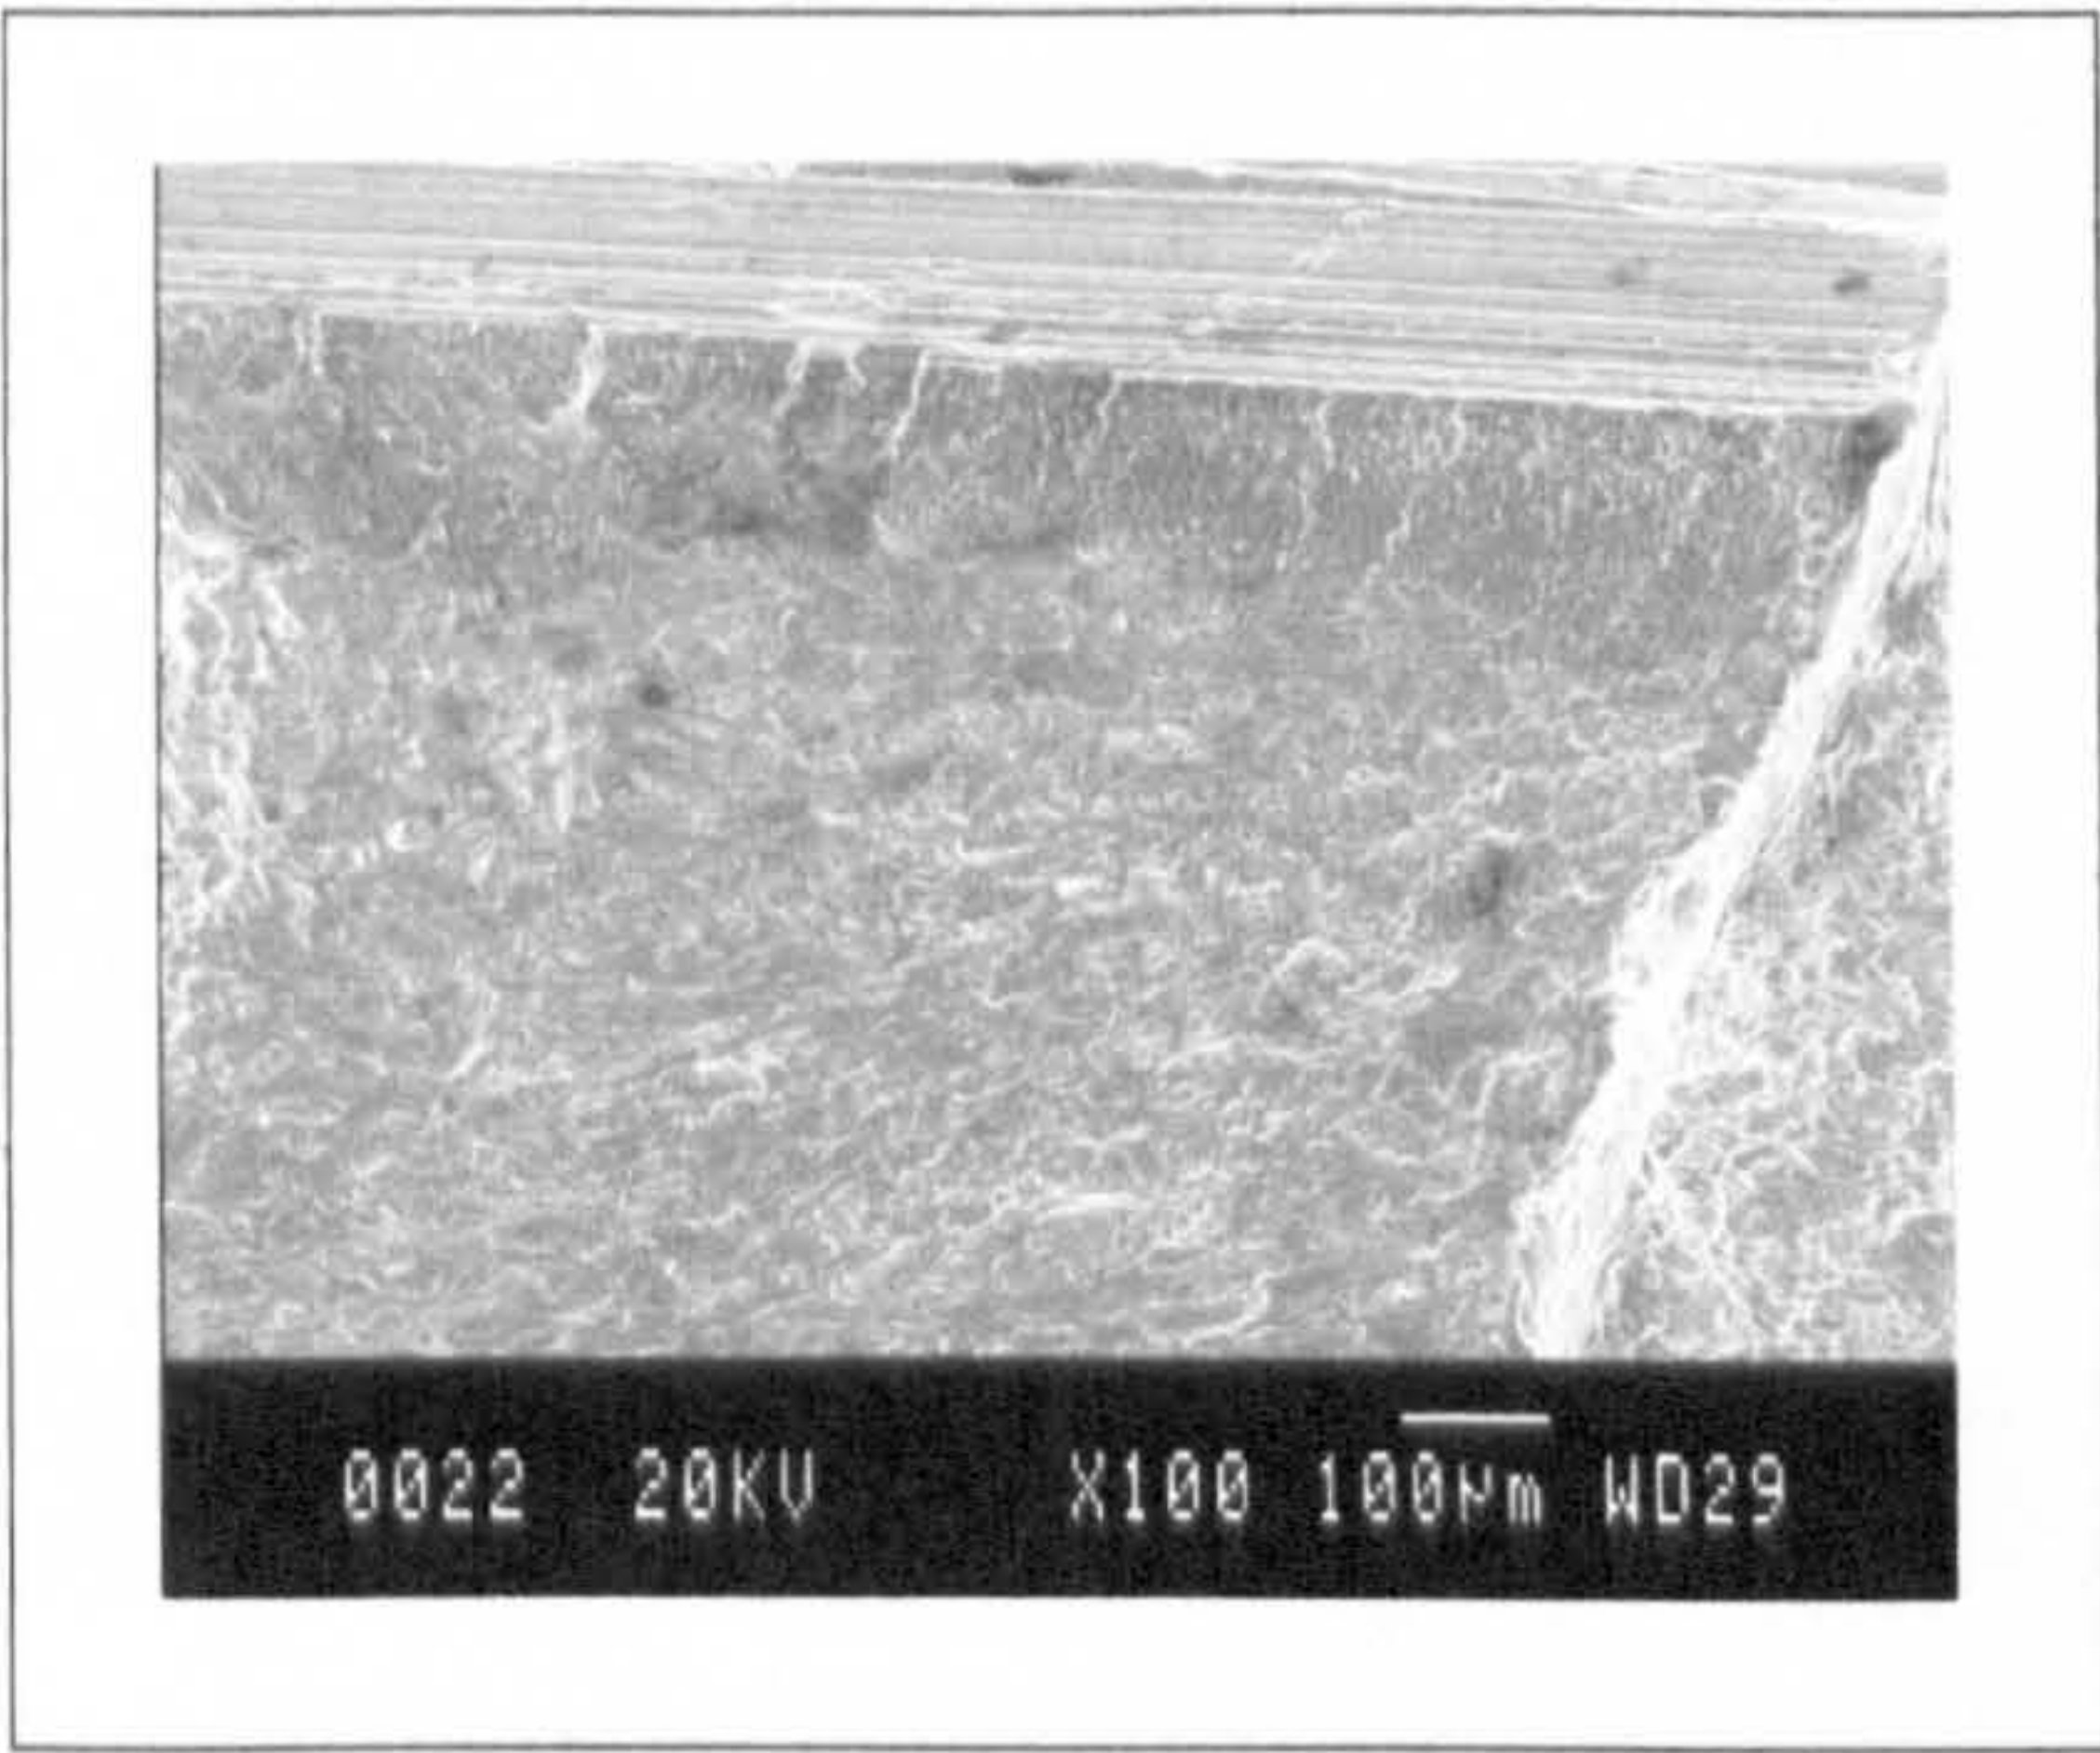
FS DP crack initiation sites resulting from score marks induced from the grinding process used to remove the flash that occurs at the edge of the tool shoulder.
